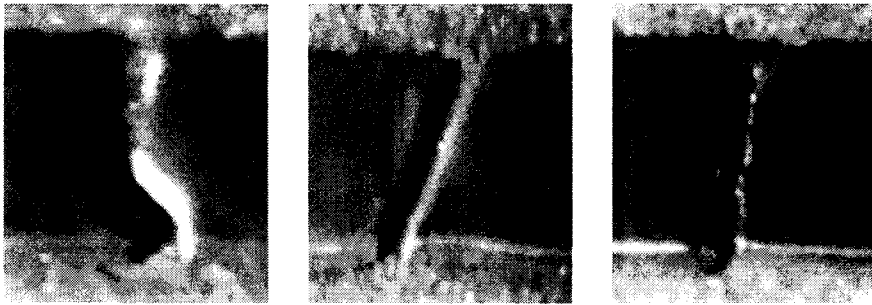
Specimen Fracture Shape of Tensile&Fatigue Test
